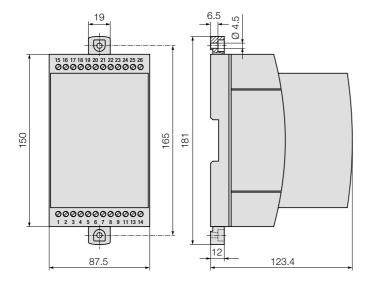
SINEAX DME 440 in housing T24, screw hole mounting brackets pulled out.
